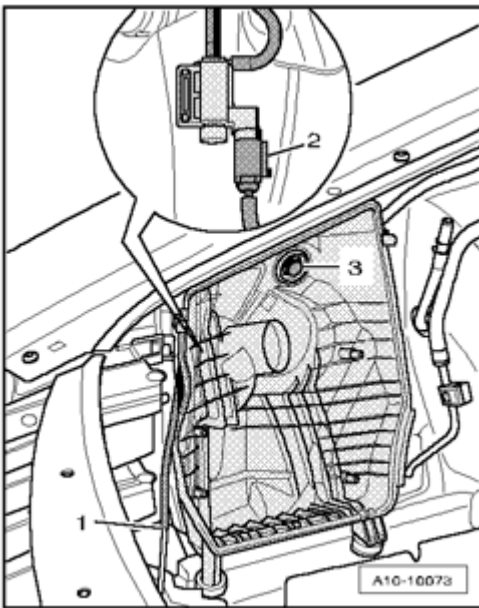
Identifying Vacuum Line, Spreader Clips & Electrical Connection
